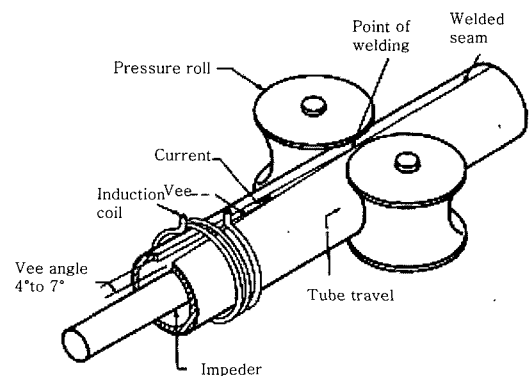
Schematics of high frequency induction welding process used in producing aluminium tube
